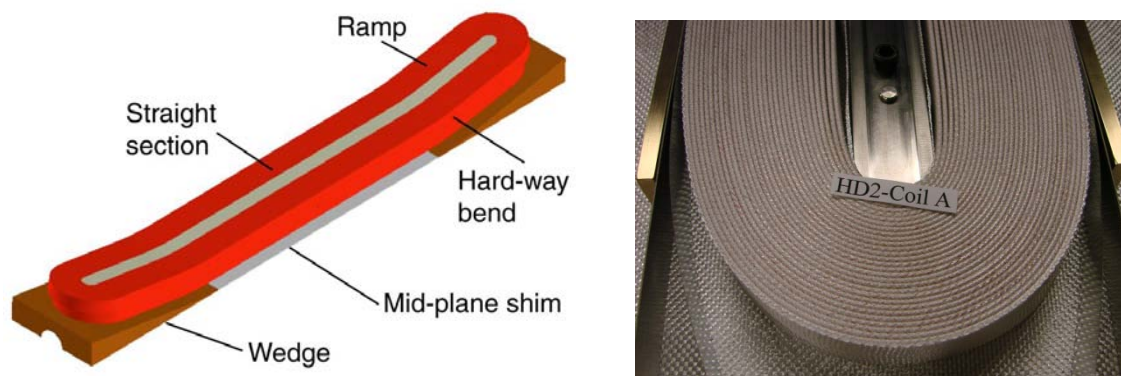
Coil geometry (left) and picture of a coil after winding (right), for HD2.
